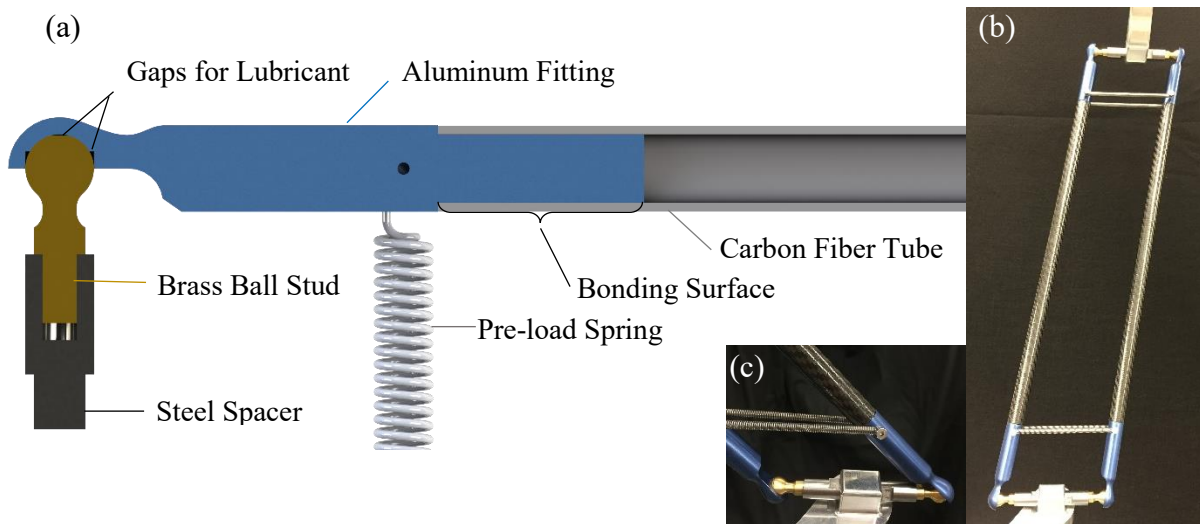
Design of Ball and Cup joint. (a) Section cut view of the details of a single ball and cup joint. (b) Picture of a complete Link 2 assembly (c) Picture of joint at end of ROM, -55° relative to vertical.
